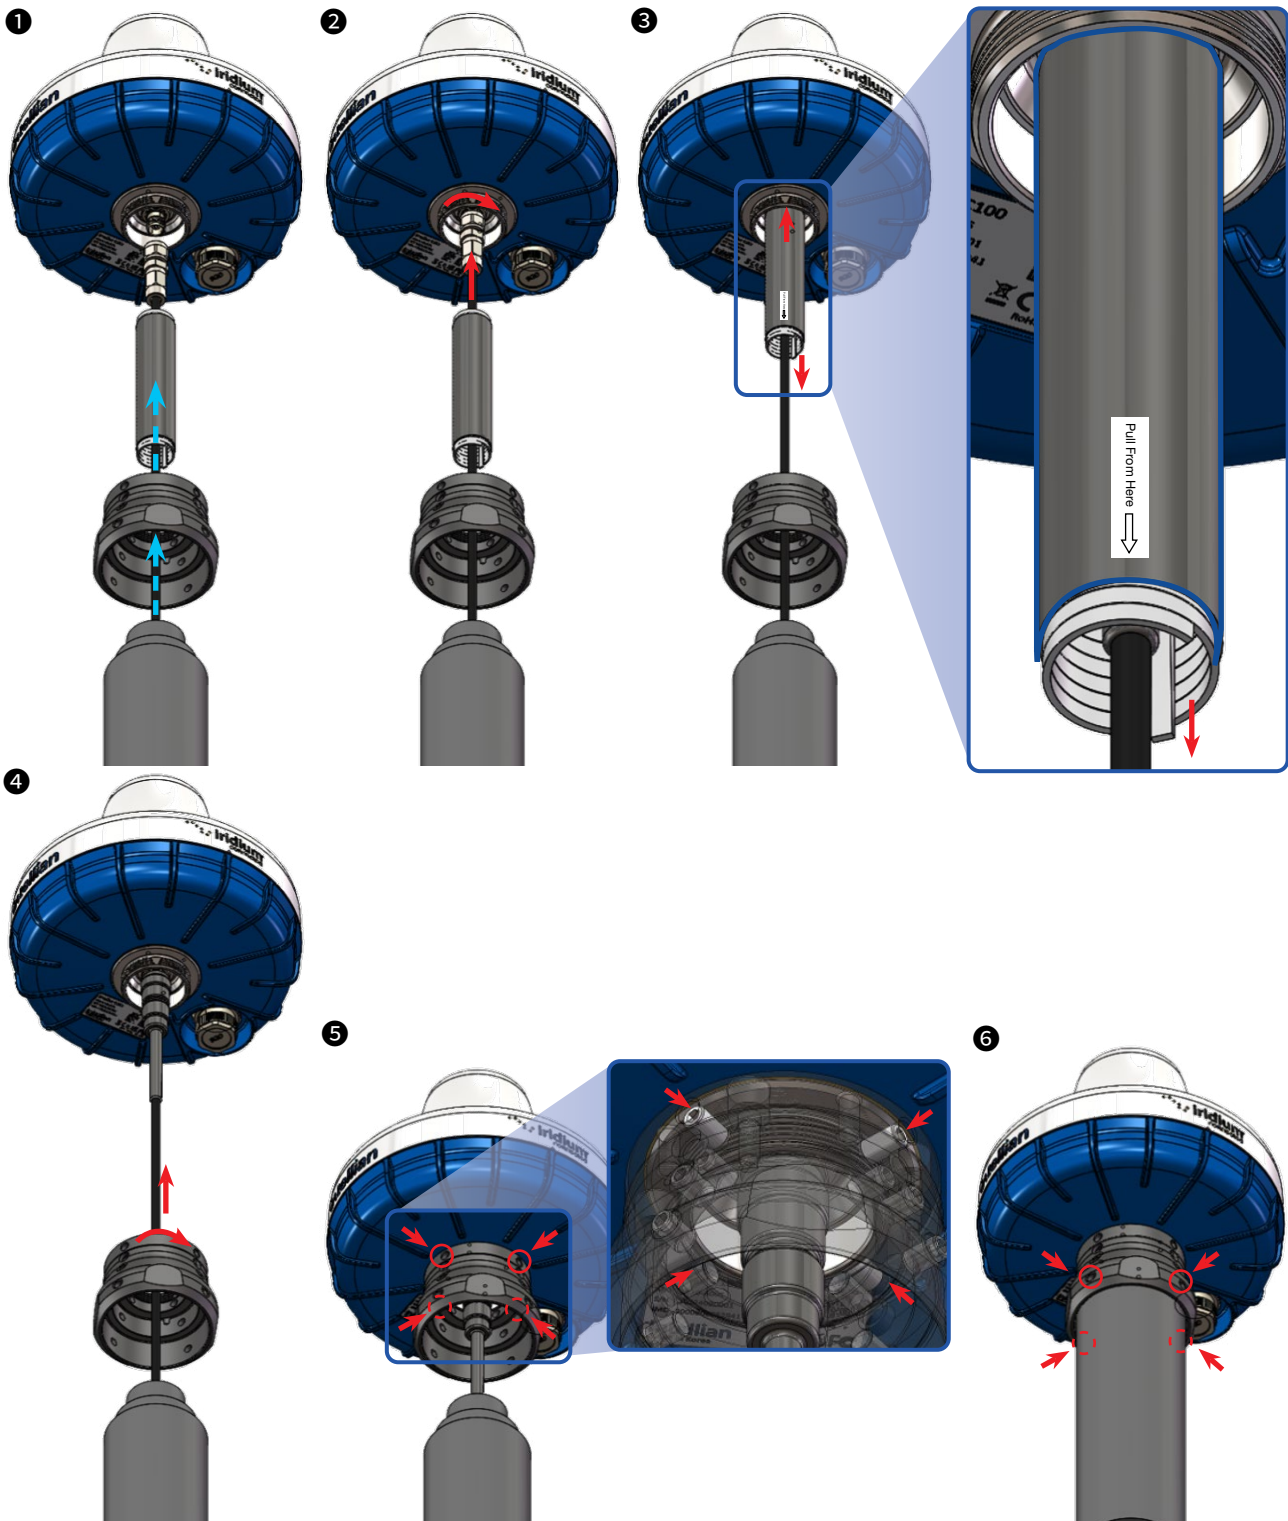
Aligned Mounting with External NMEA 2000 Cable Installation
